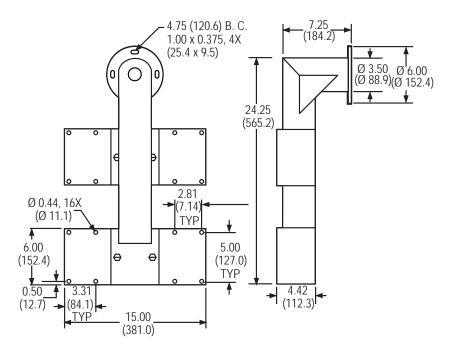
Dimensions, Parapet Mount. Dimensions in inches (mm) CohuHD p/n 7411426-001
